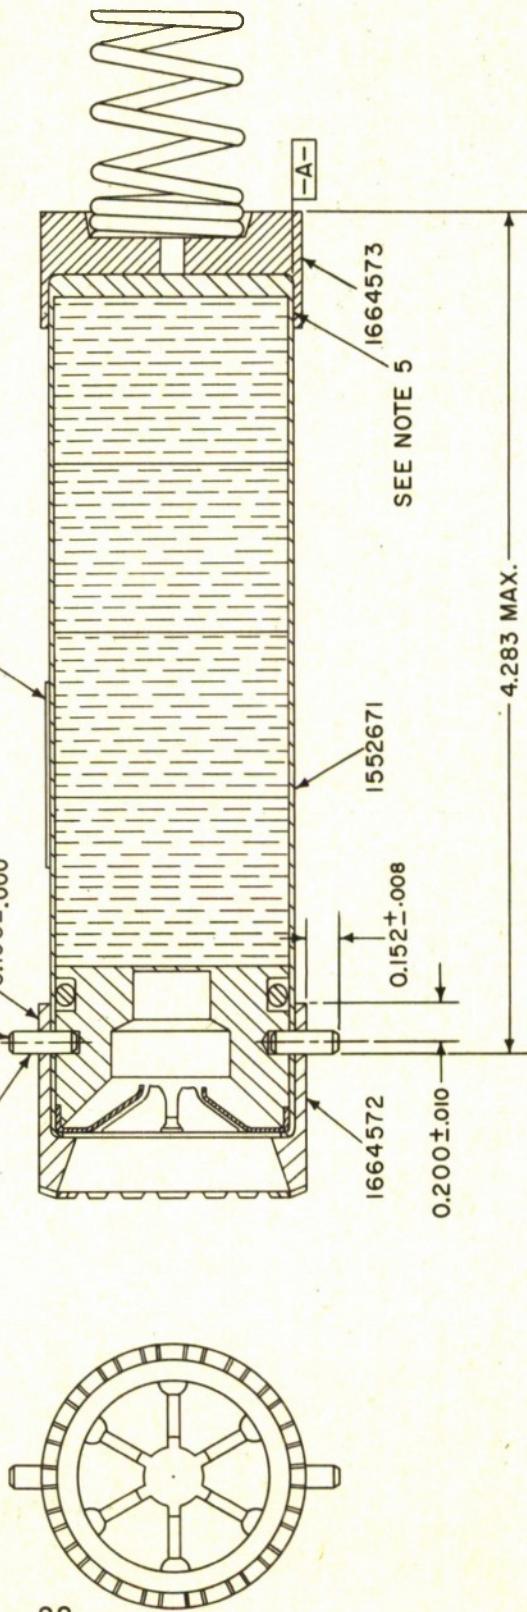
BOOSTER, WARHEAD, MK 36, MOD 1 ASSEMBLY
